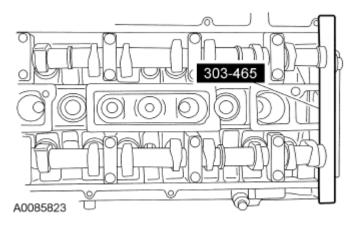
Identifying Camshaft Alignment Plate With Special Tool Courtesy of FORD MOTOR CO.
